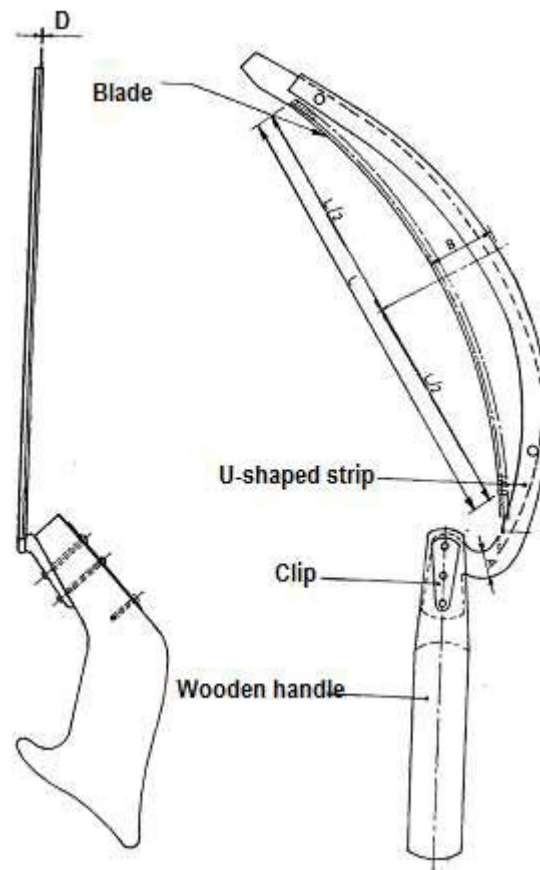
Dimensions for sickles with reinforcing strip in millimetres
